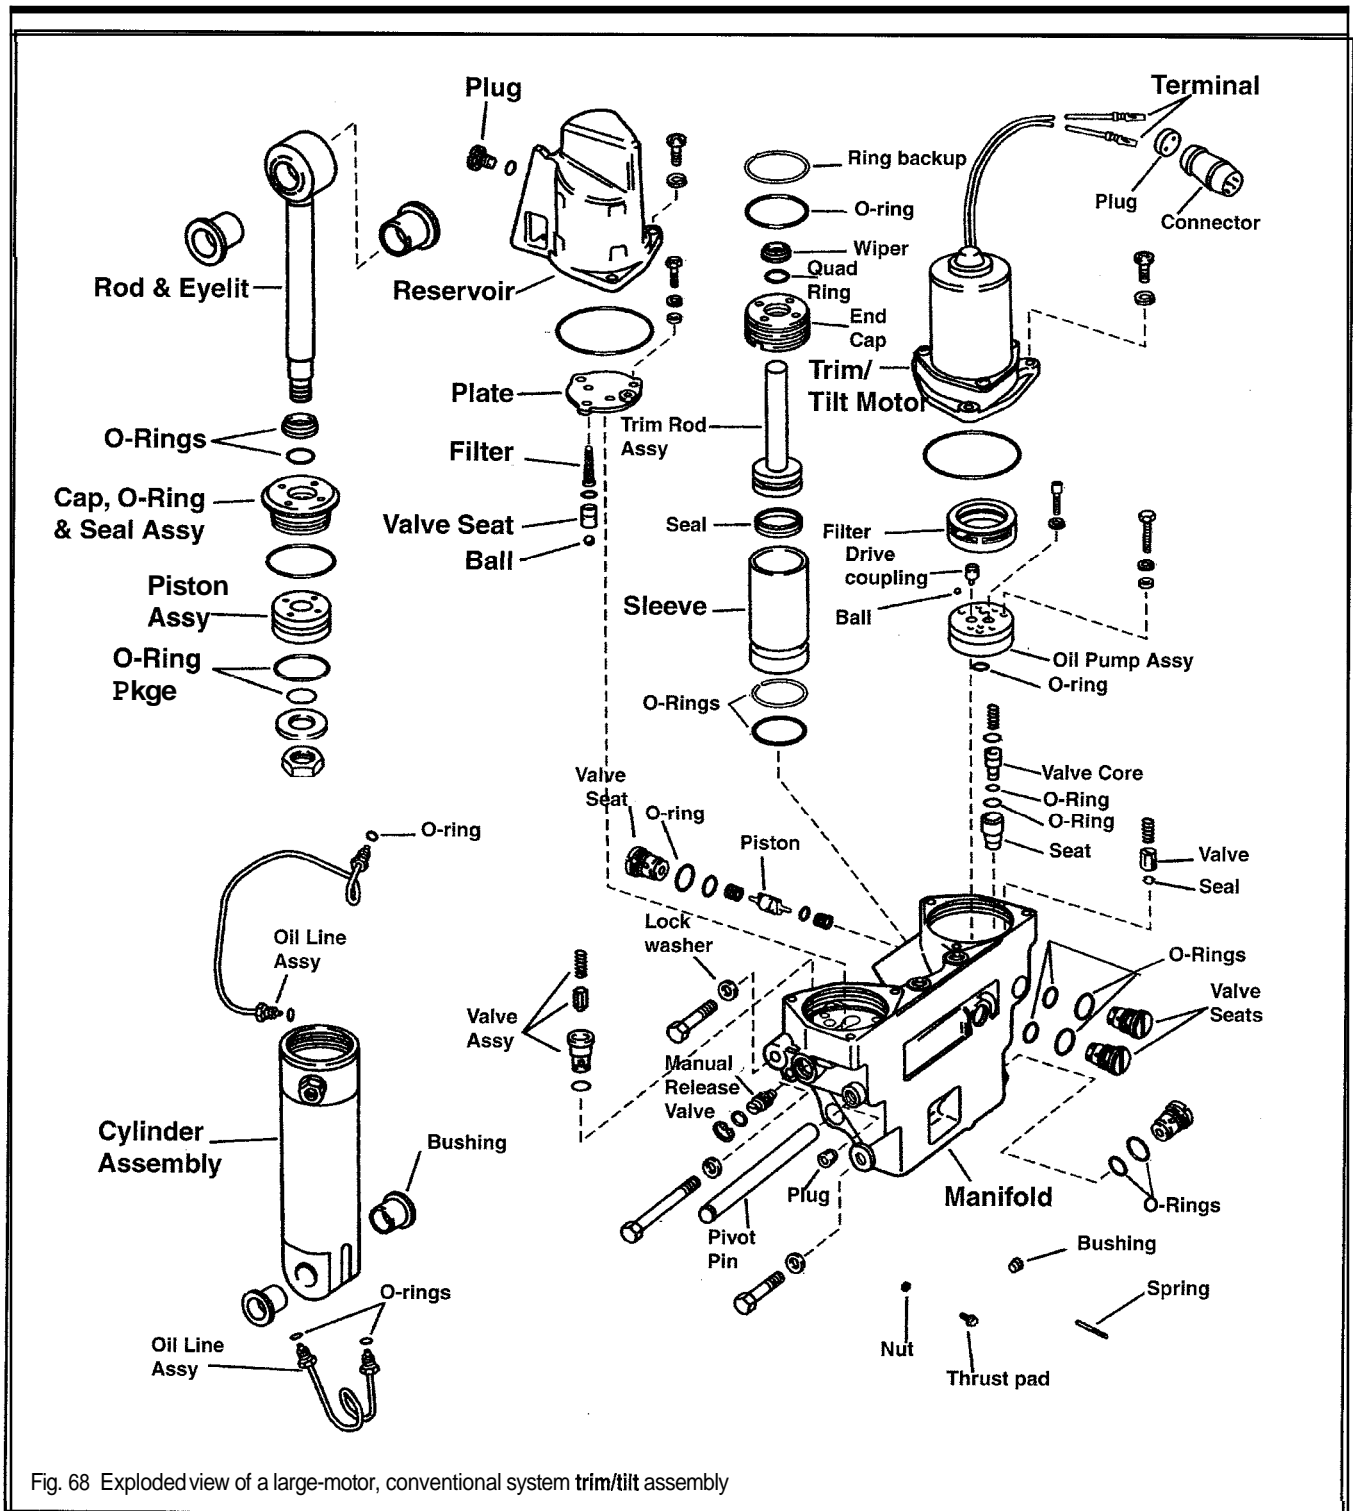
Exploded view of a large-motor, conventional system trim/tilt assembly
